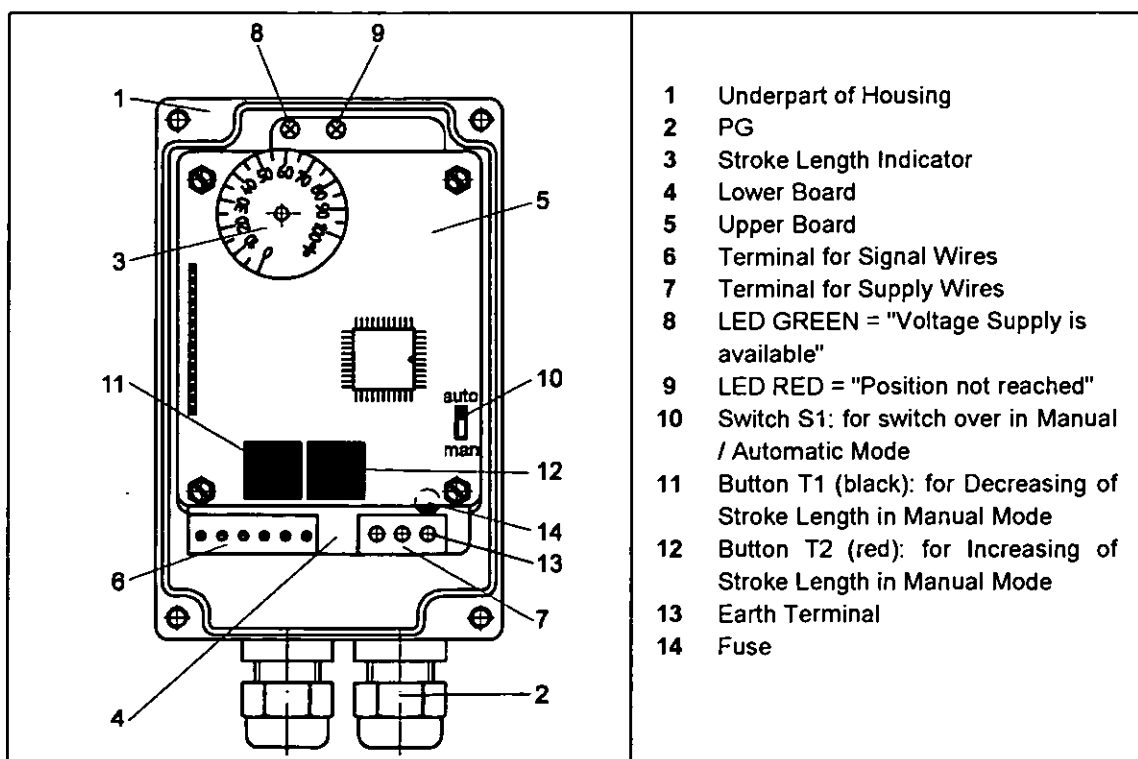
Adjusting Drive PSE 102 (Version B)
